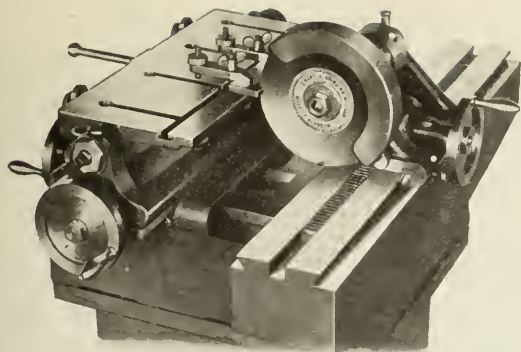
Work-table and Wheel-slide of Gage Grinder
